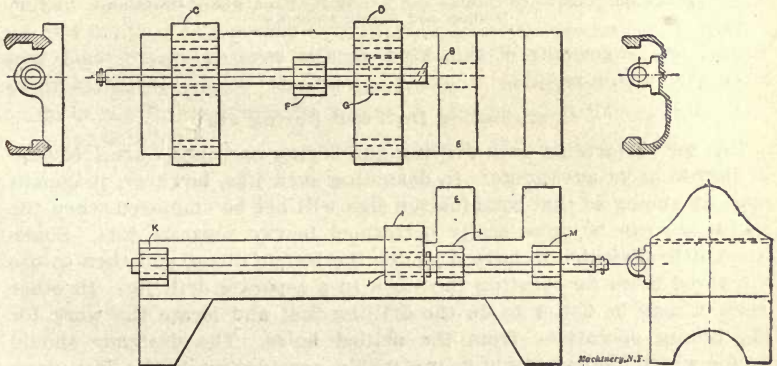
Examples of Boring where Parts of the Machine being Built are Used as Guiding Means
